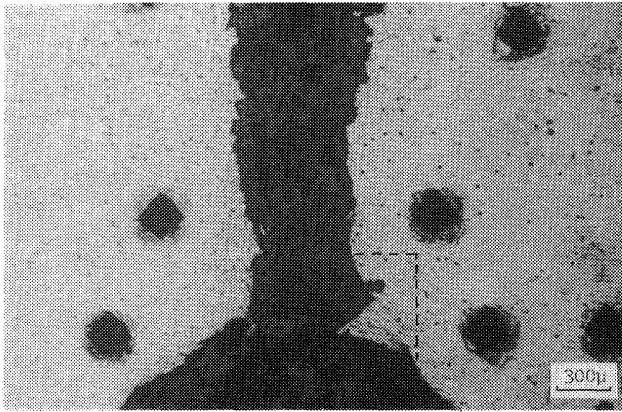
Macroscopic view of fracture path in the negative specimen (B2), showing almost straight fracture line going exclusively through the bonding line.
